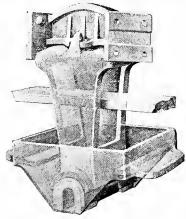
Rocker Side Bearing for Summers Balanced Side Bearing Truck. Summers Steel Car Company.
